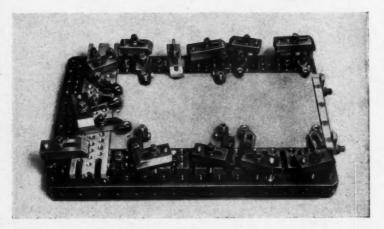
A close-up view of the drill jig seen in course of construction in Fig. 4, showing the rebated plates which hold the work to be drilled clear of the base plate, and the bush holders which can be fitted with bushes of different bore diameters
